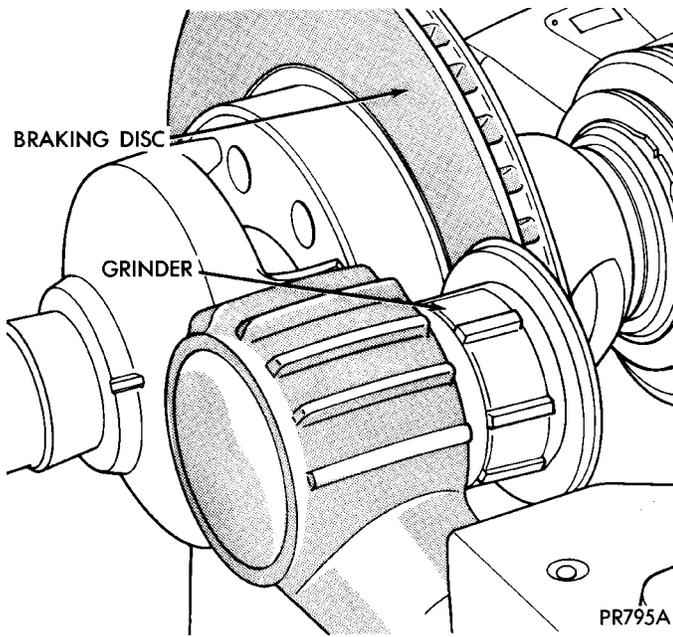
Resurfacing Brake Rotor (Final Finish)
